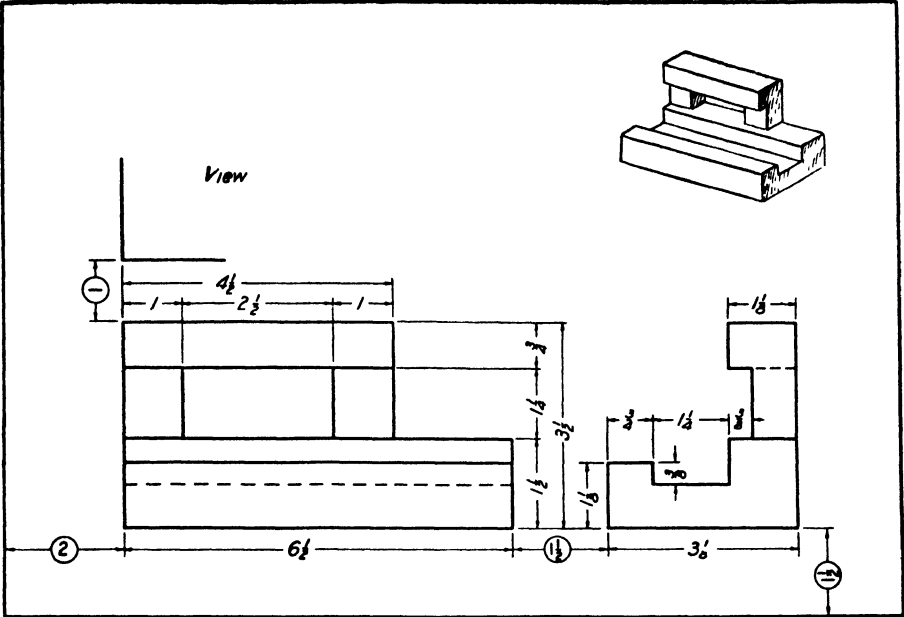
Prob. 112. Draw three complete views of the support guide.
